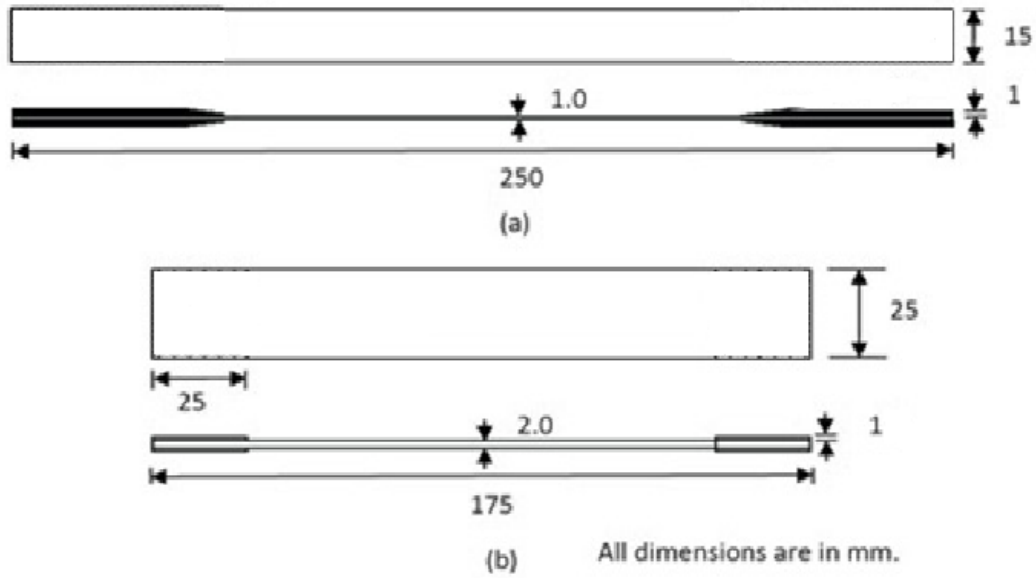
a) Rectangular specimen dimensions for Longitudinal loading b) Rectangular specimen dimensions for Transversal loading [12]
